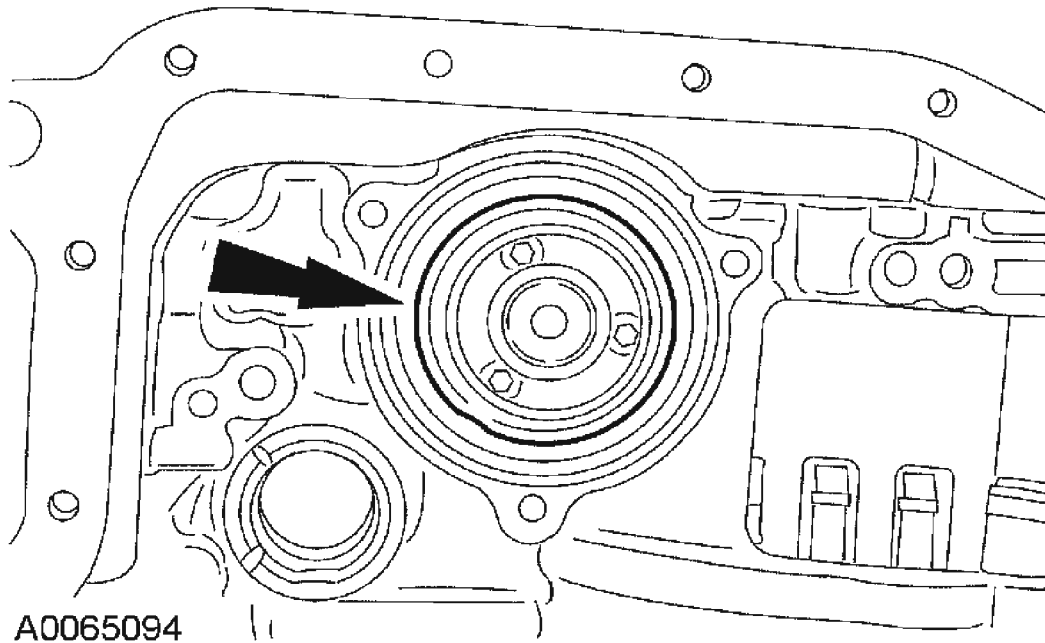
Removing Intermediate/Overdrive Servo Piston
